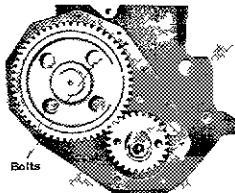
Removing Crankshaft Thrust Plate Bolts
